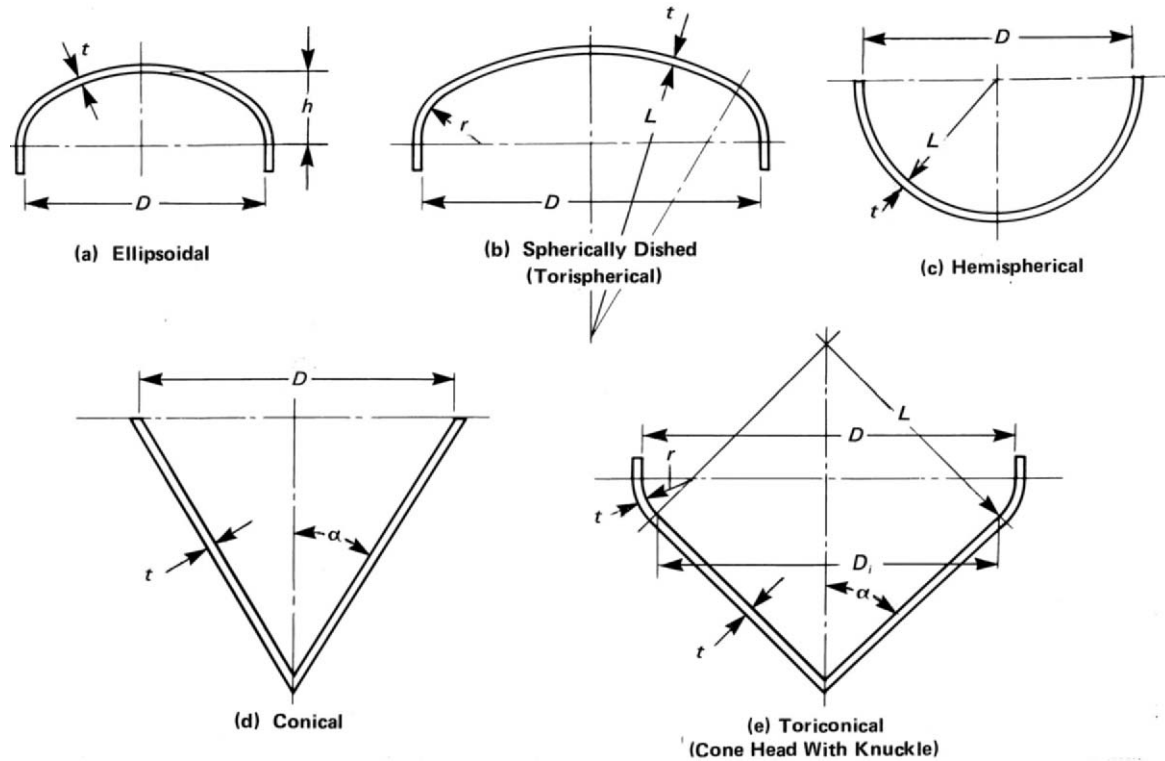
PRINCIPAL DIMENSIONS OF TYPICAL HEADS
